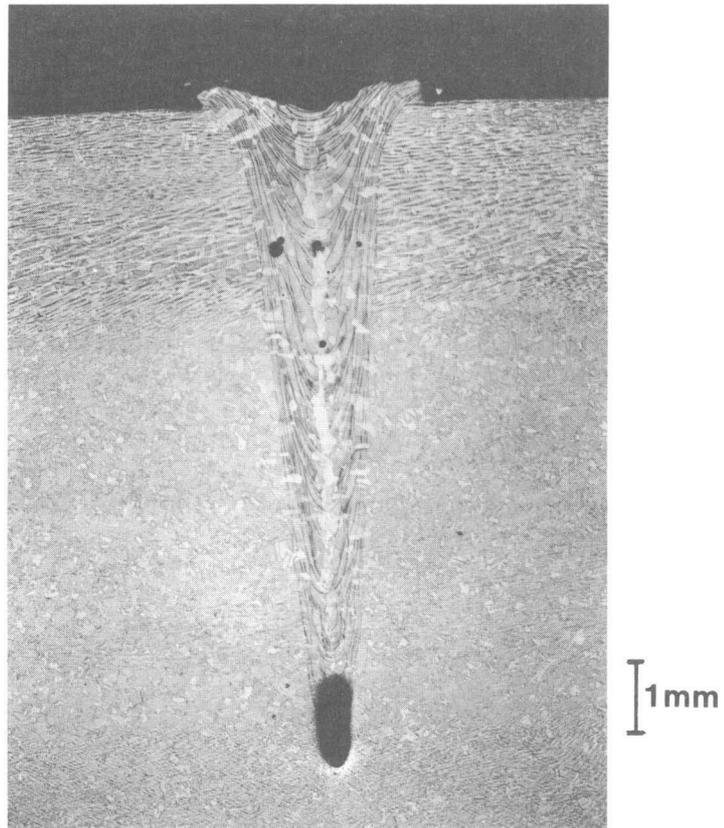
Cross section through electron beam weld in copper
